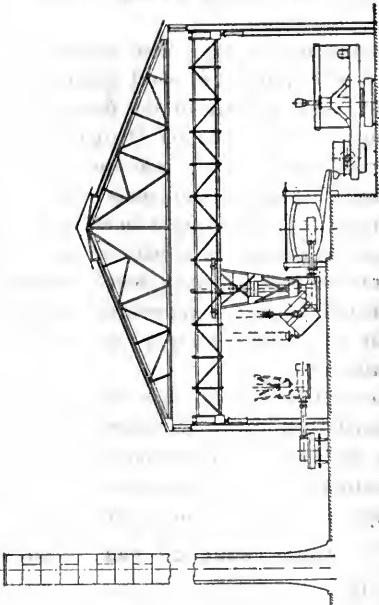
Elevation through Open-Heath Furnace, showing Charger and Locomotive Casting Crane.
